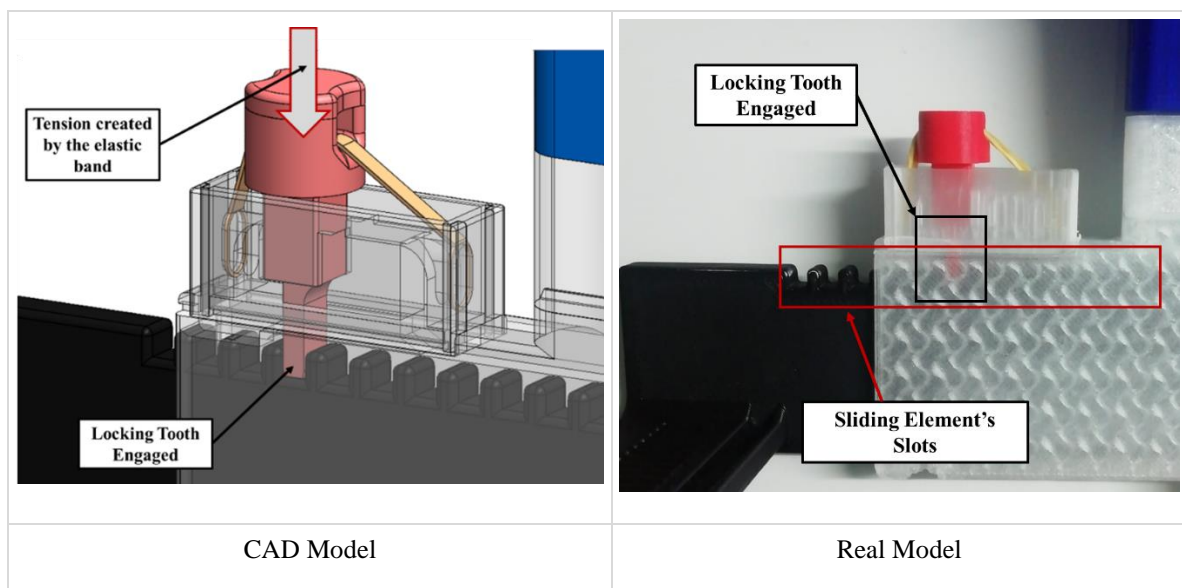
Locking Tooth Engaged Locking the Sliding Element's Movement, CAD vs Real
